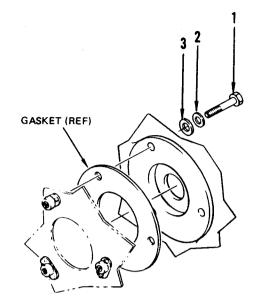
Removal; Forward Fuselage Tank (Sheet 4)
